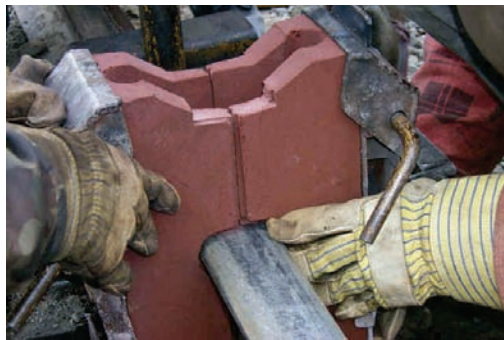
Three piece Mould and Mould shoe fixed with moulds
